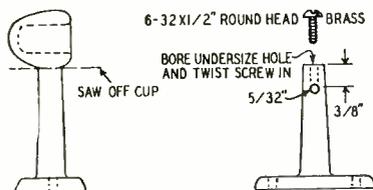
(left)—Insulator comes with cup at top to take towel rod. Begin conversion by sawing off cup as is indicated. Fig. 2 (right)—Twist a half-inch screw into a slightly undersized hole bored in the top; then bore a transverse hole to pass the wire through the new insulator.
